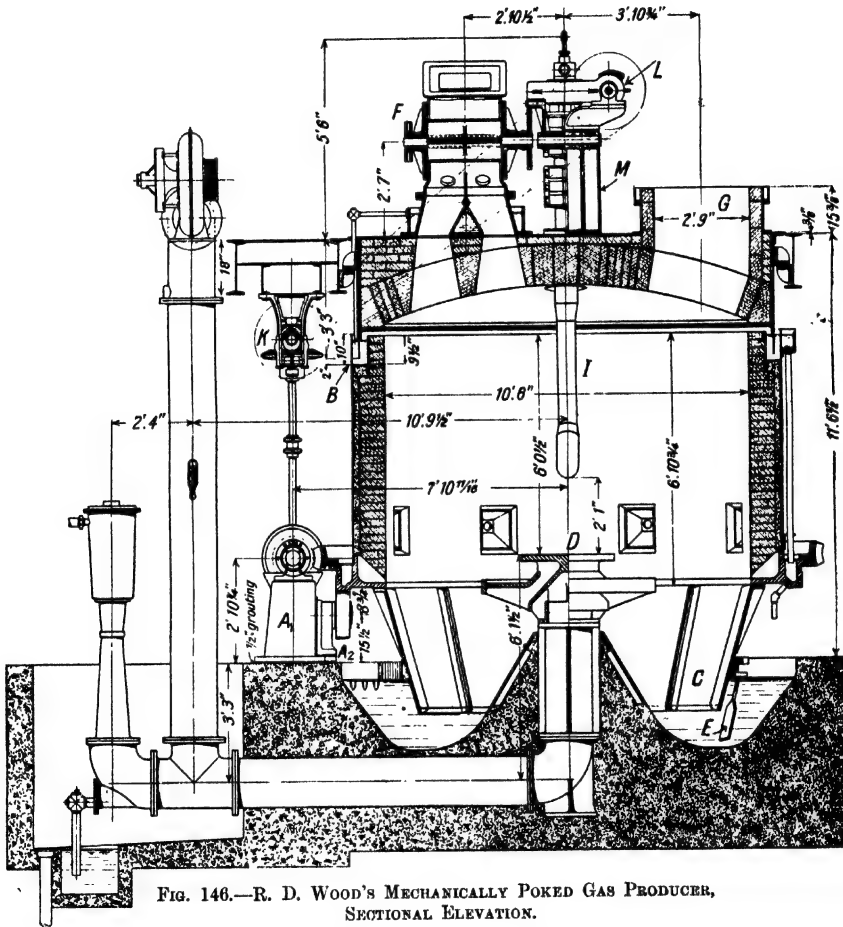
R. D. WOOD'S MECHANICALLY POKED GAS PRODUCER,
